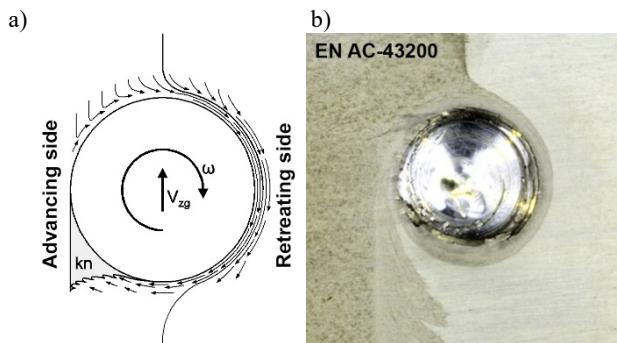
Schematic image of the metal motion around the tool pin (a) and cross-section of the joint perpendicular to tool axis, in the place of retracted tool pin (b); kn – place of possible forming of wormhole discontinuities
